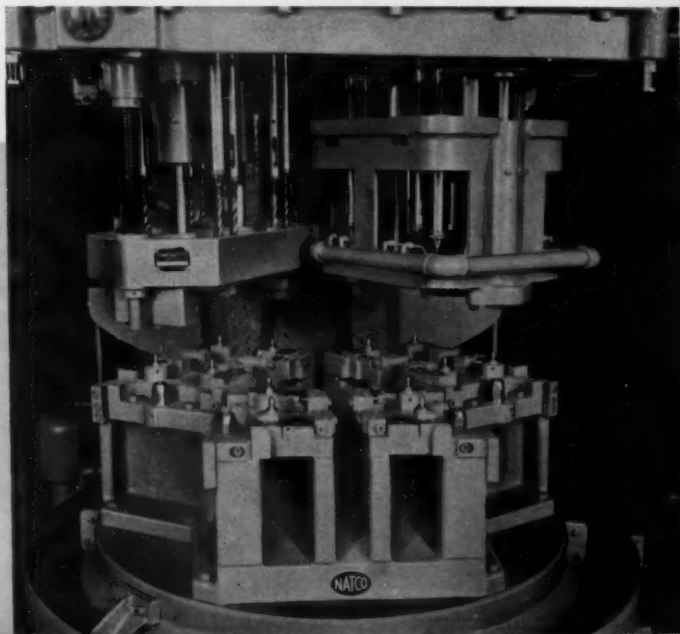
(Left) Open grid base lets chips fall through this pallet fixture.
